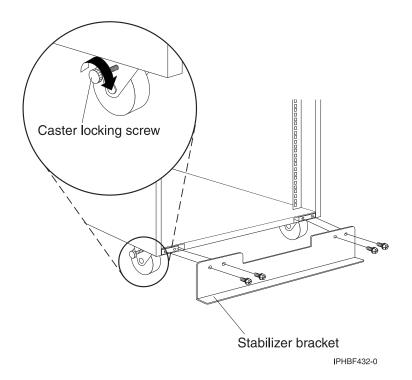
Tightening the caster locking screw and attaching the stabilizer.
